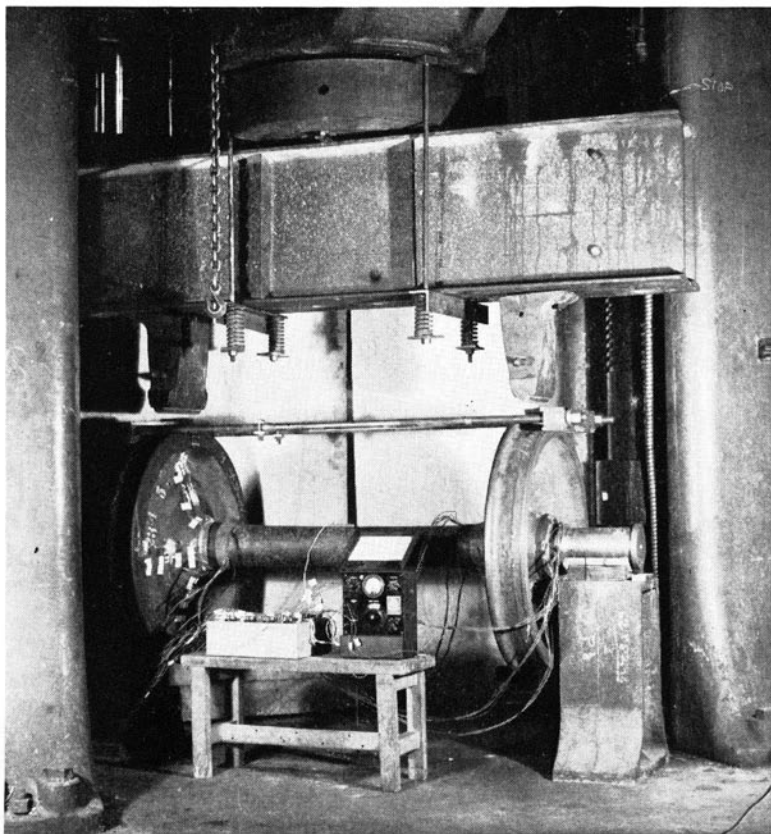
WHEELS AND AXLE ASSEMBLY IN 3,000,000-LB CAPACITY TESTING MACHINE
